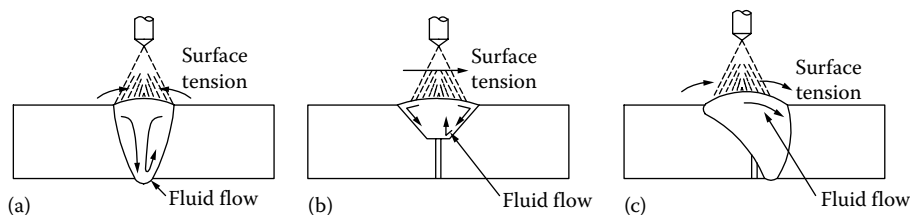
Weld metal penetration: (a) good penetration; (b) variable penetration due to absence of surface active elements, shallow penetration; and (c) off-center penetration. (After The Welding Institute, *Weld. J.*, December, 53, 1986. Excerpted from *Effects of Residual, Impurity, and Microalloying Elements on Weldability and Weld Properties*, The Welding Institute, 1985; adapted by Hallock C. Campbell.)
